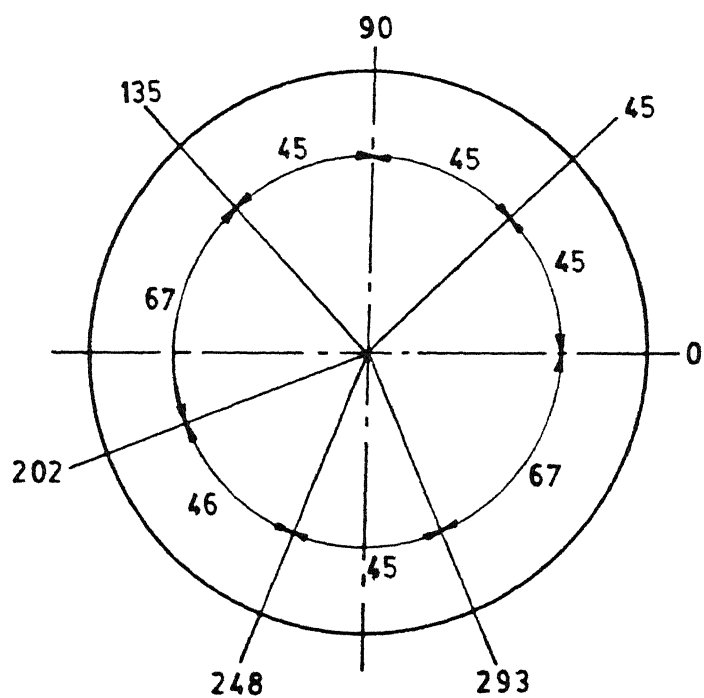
BLADE LOCATIONS OF CUTTER DESIGN 2
